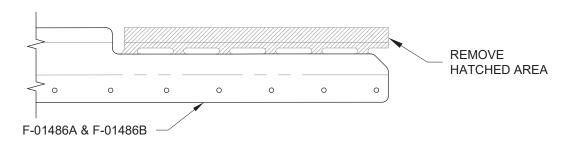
MODIFY J-STIFFENERS (SHOWN FLAT)
